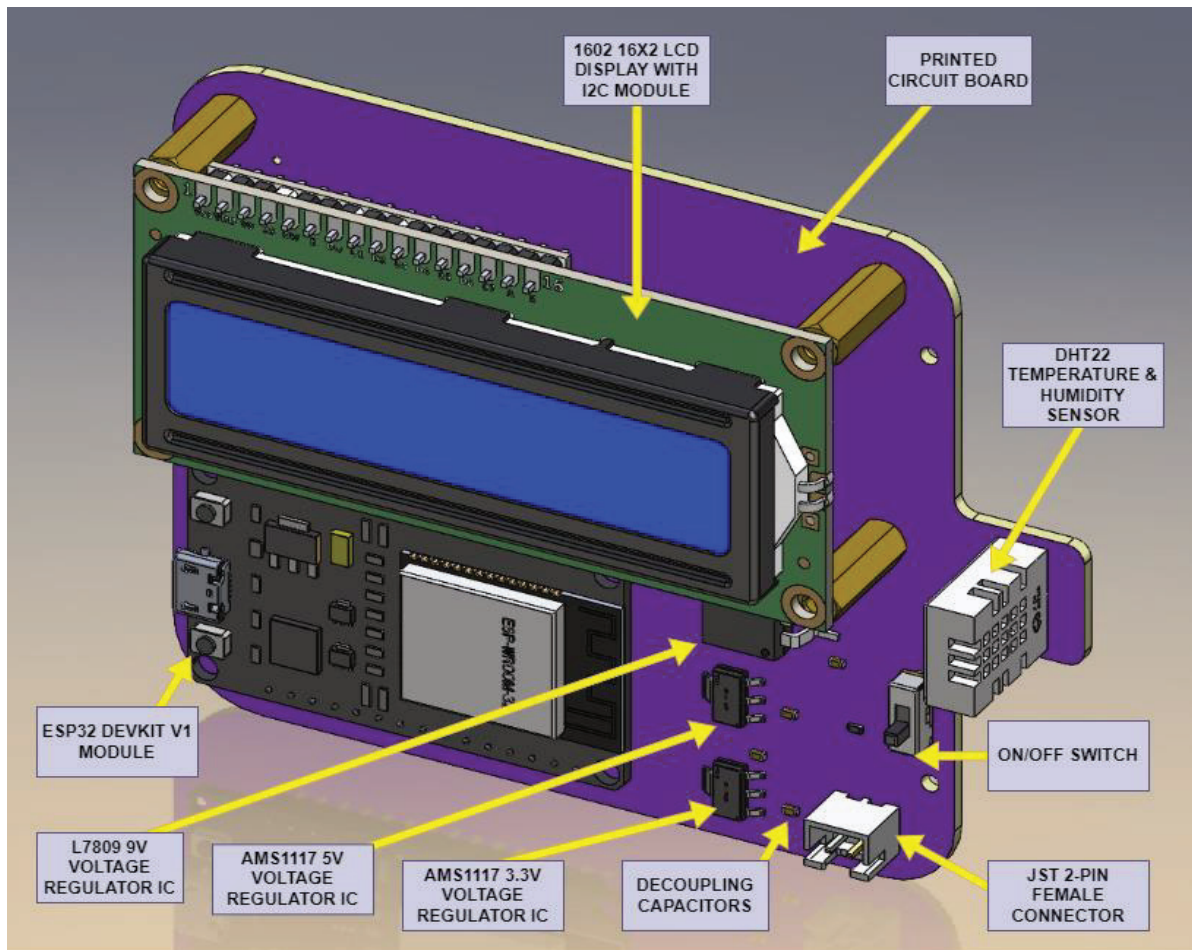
Labelled CAD Model of the Actual Component Placement on the PCB
